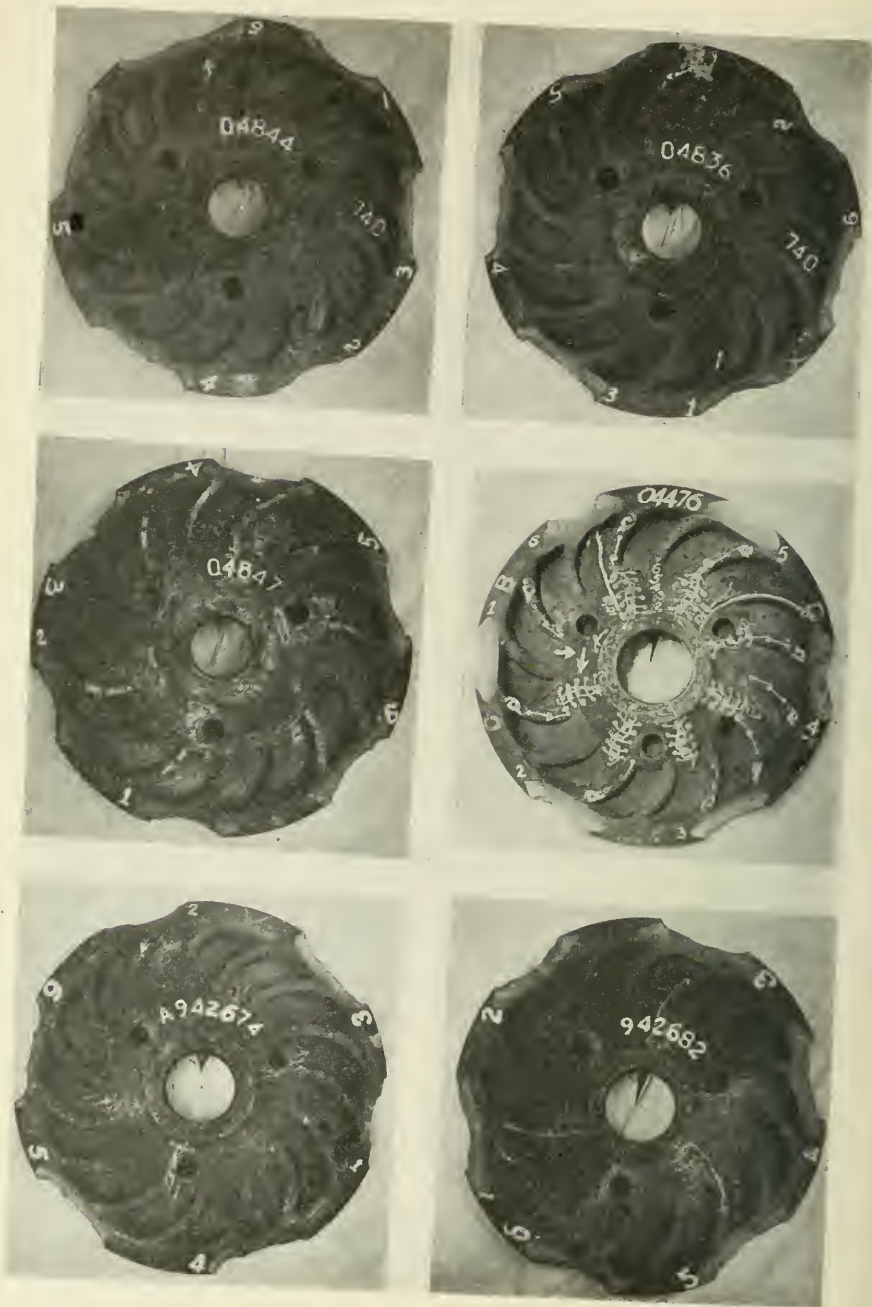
INNER FACES OF WHEELS NOS. 04 844, 04 836, 04 847, 04 476, 942 674, AND 942 682 AFTER FRACTURE OF FLANGE
